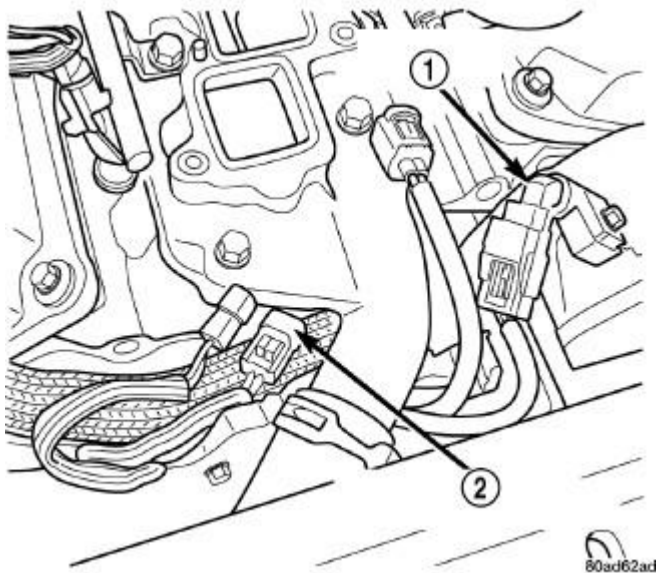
Engine Coolant Temperature Sensor - 3.5L
